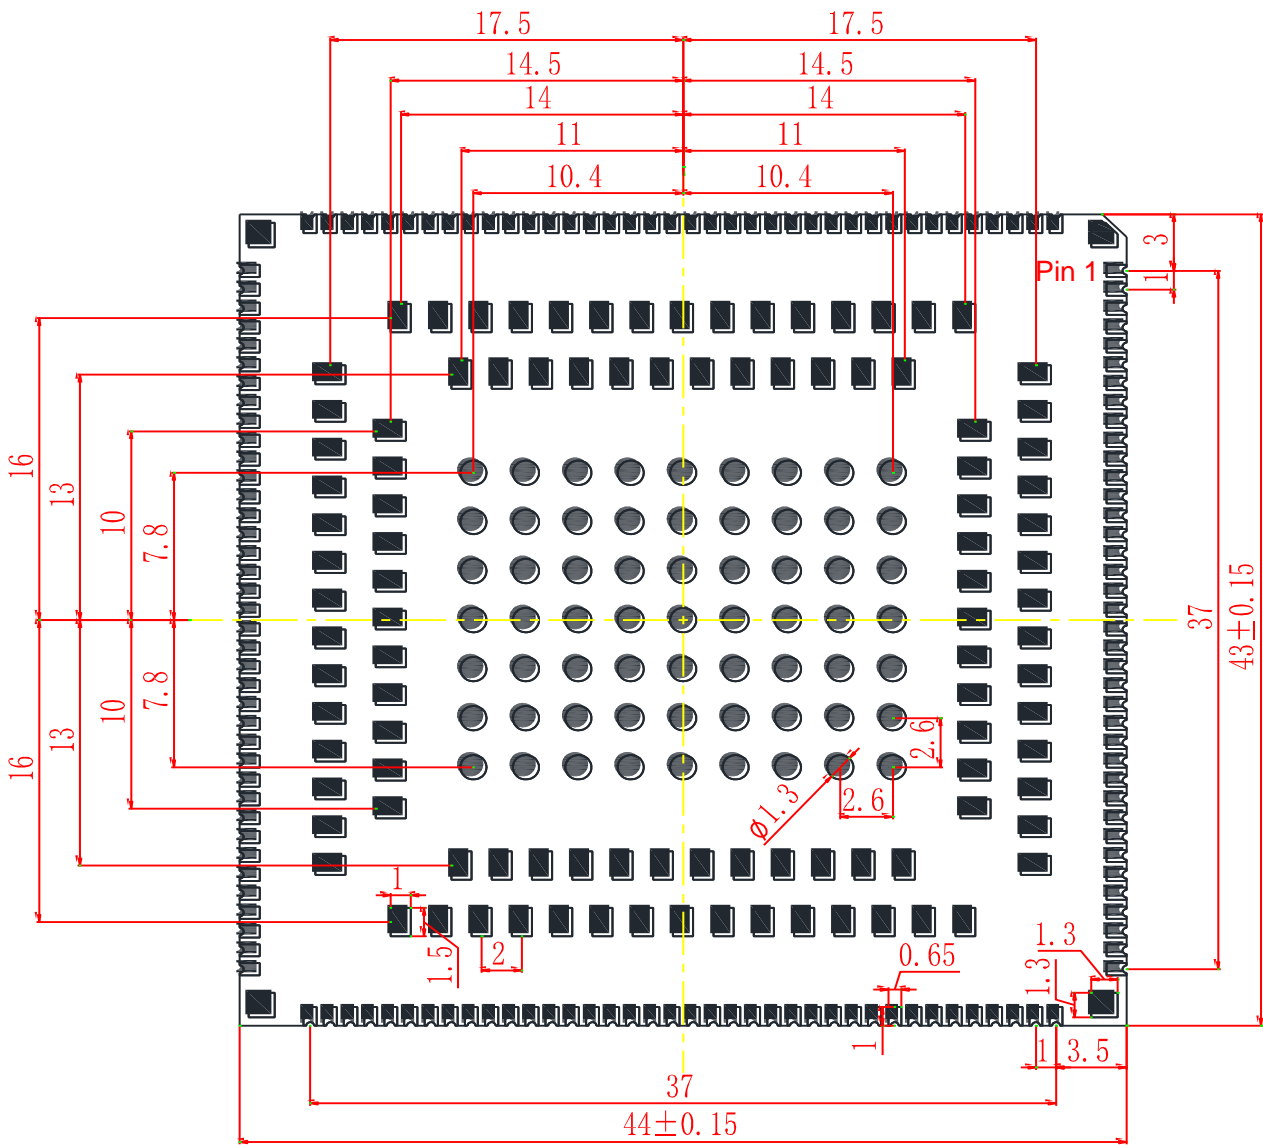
Module Bottom Dimensions (TOP View, Unit: mm)
